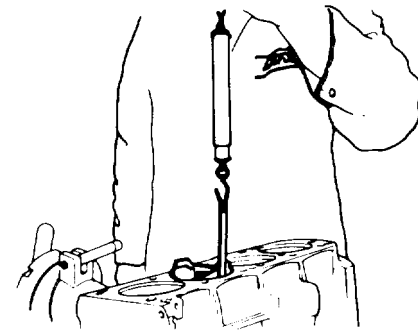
Measuring Clearance between Piston and Cylinder
